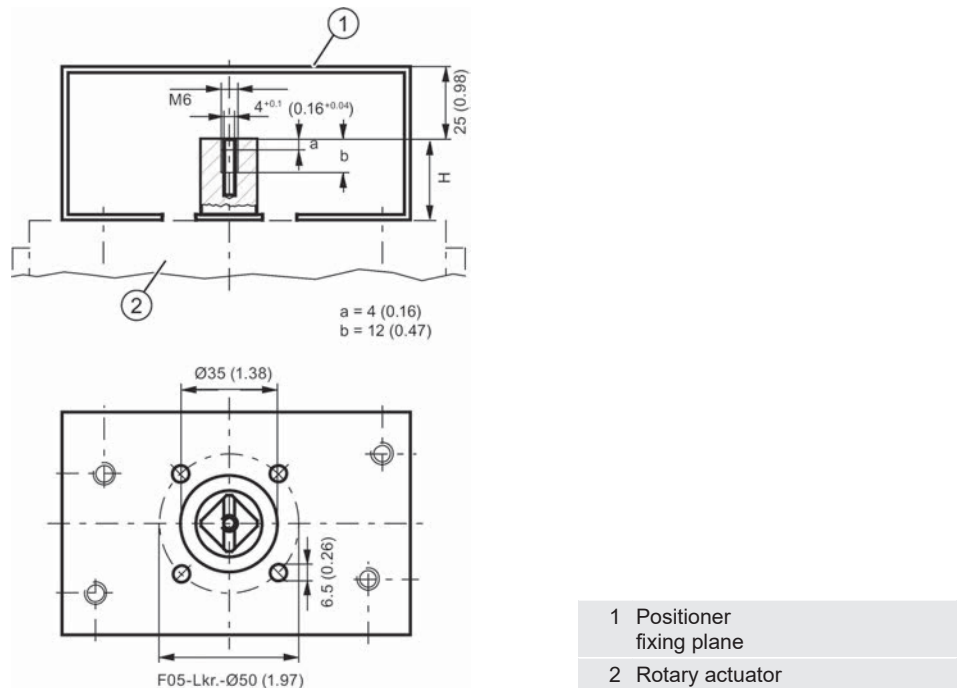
Mounting bracket (supplied by the actuator manufacturer) and dimensions
